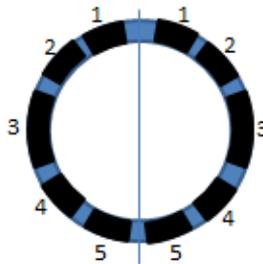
Welding procedure qualification test – sampling of test specimens for girth butt welds, where: 1 – macro, micro and hardness test specimens (PA - downhand), 2 – tensile and bend tests, 3 – fracture toughness specimens, 4 – tensile and bend tests (PE - overhead), 5 – macro, and hardness test specimens (PE – overhead)
